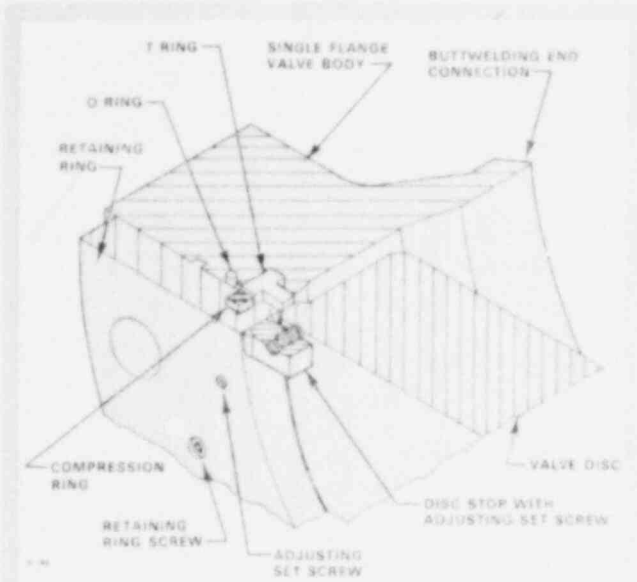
9200 Series Specification B-1 Valve T-Ring Details (Optional Single-Flange/Buttwelding End Construction)
